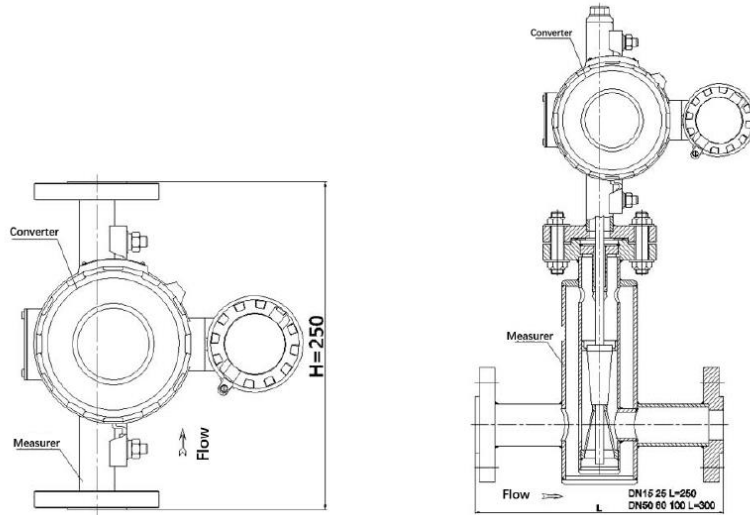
Outline Drawing for Vertical Installation Figure 3 Outline Drawing for Horizontal Installation
